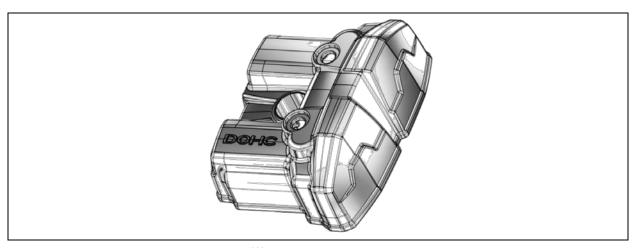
Cylinder Head Cover (XY150)²⁰³
